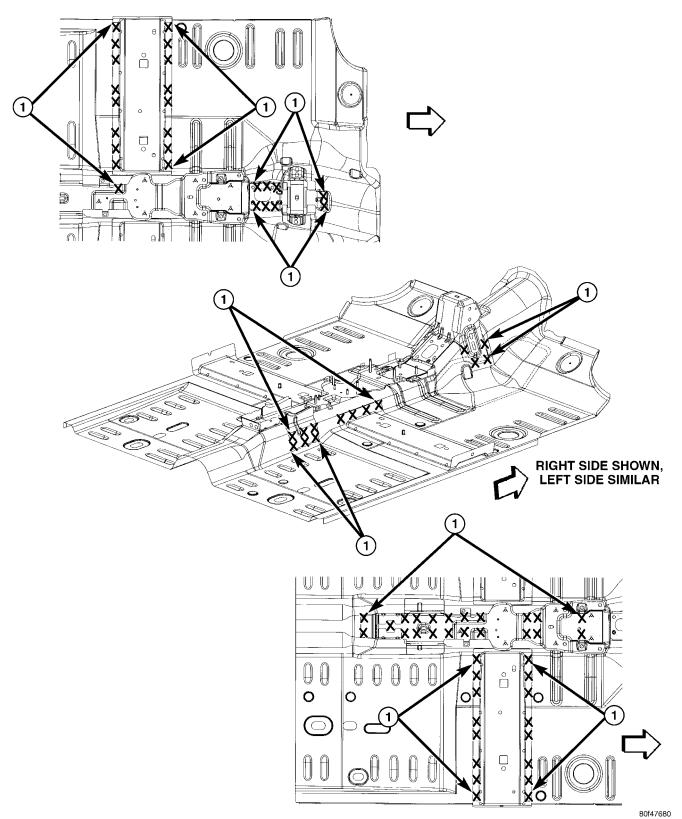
CONSOLE MOUNTING BRACKET AND FRONT SEAT REINFORCEMENTS TO FRONT FLOOR PAN
